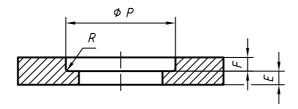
Grinding wheel recessed on one side, e.g. as specified in ISO 603-1
